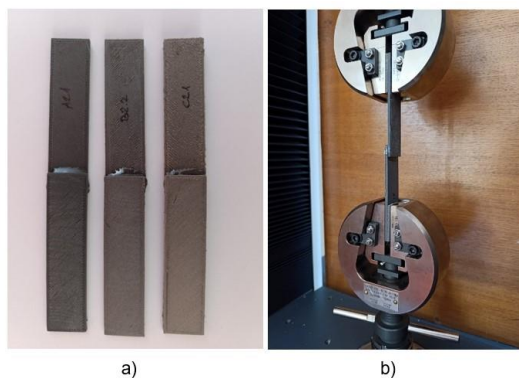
a) Appearance of bonded samples b) The tensile shear test.
